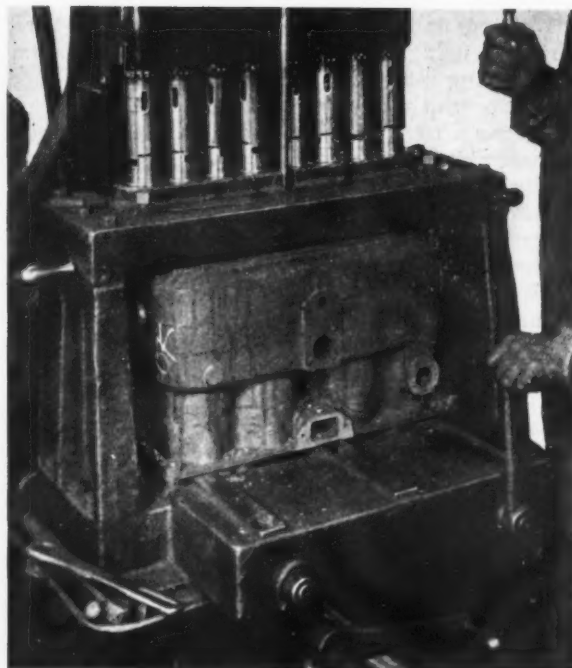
Boring the valve plug holes in the cylinder casting. Note type of jig used
